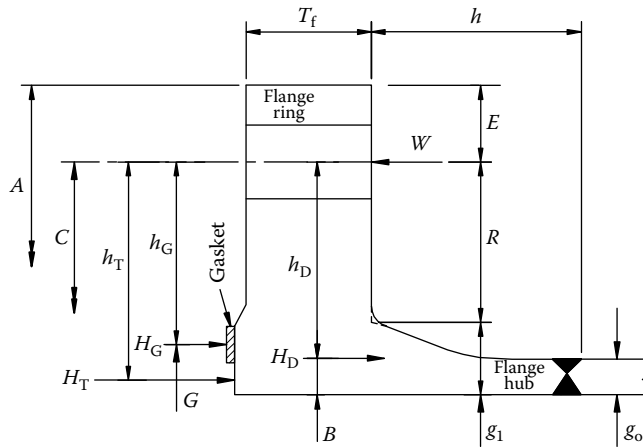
Dimensional data and flange forces—weld neck flange.
